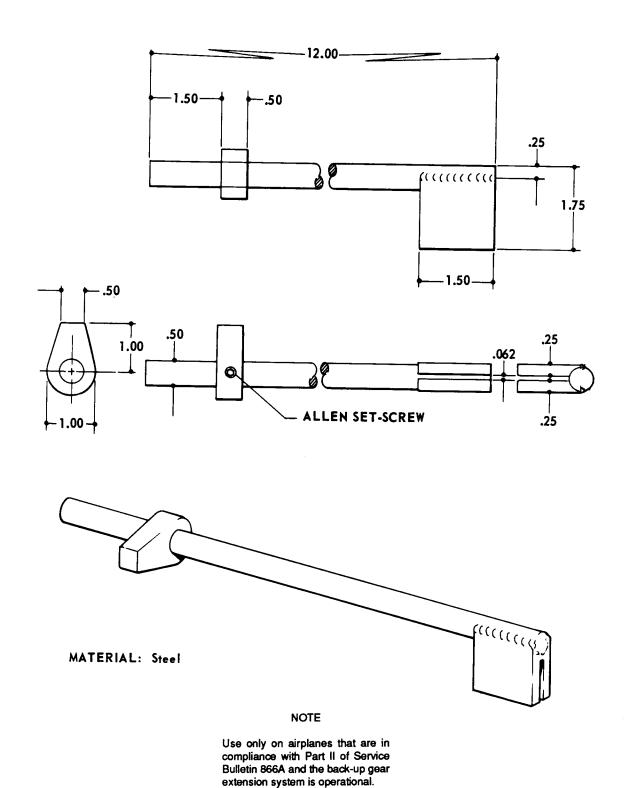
10. Gear Back-Up Extender Actuator Aligning Tool
